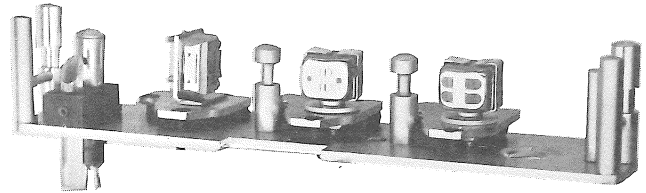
5 2-TRACK STEREO HEAD ASSY.
